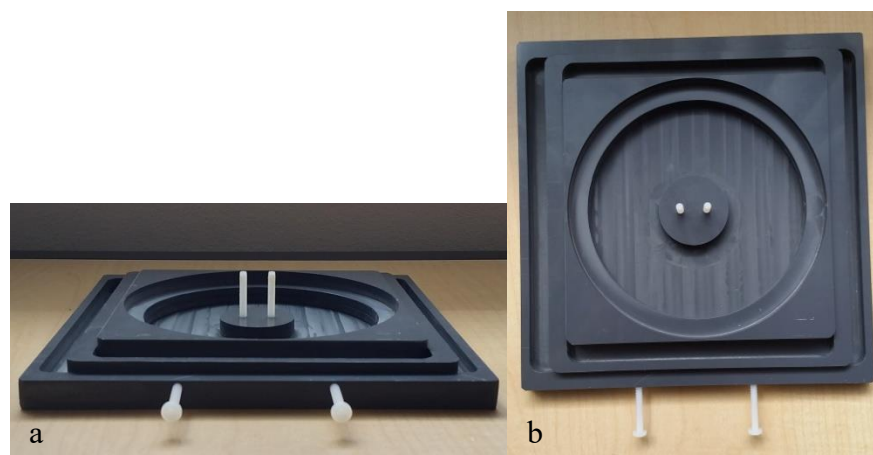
Apparatus base plates: (a) Front view of the three base plates, (b) Top view of the three base plates.
